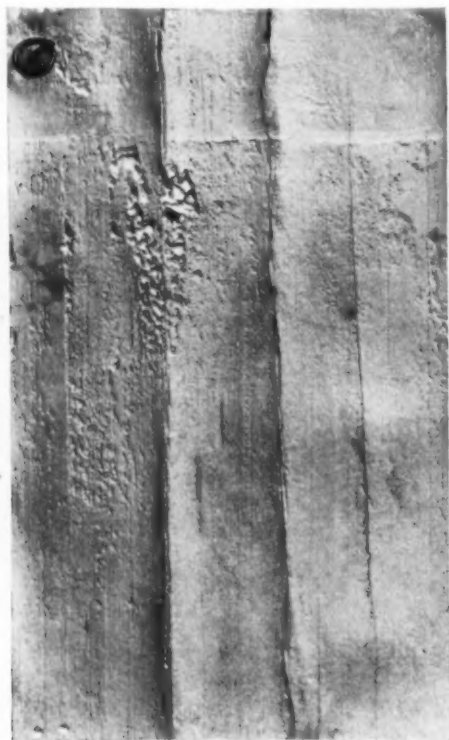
CORROSION ON TUBE CONTAINING INTERIOR SURFACE DEFECTS.
